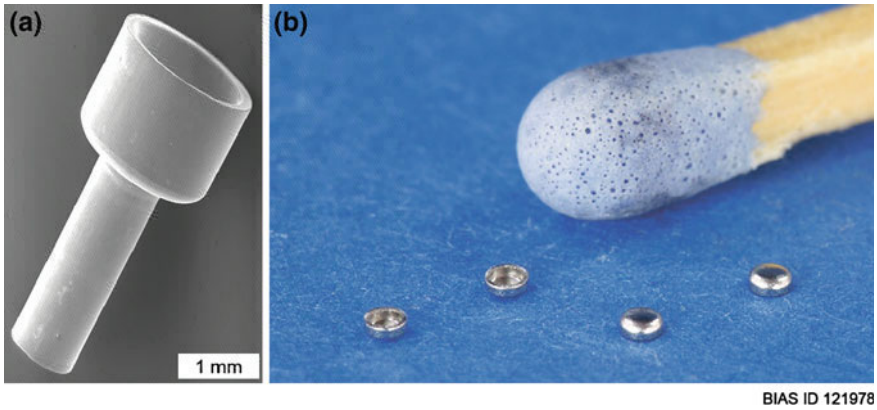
a Deep-drawn shaft of a micro motor (18 drawing steps), courtesy of U. Engel. b Deep-drawn end caps for resistors, courtesy of Stüken GmbH & Co
